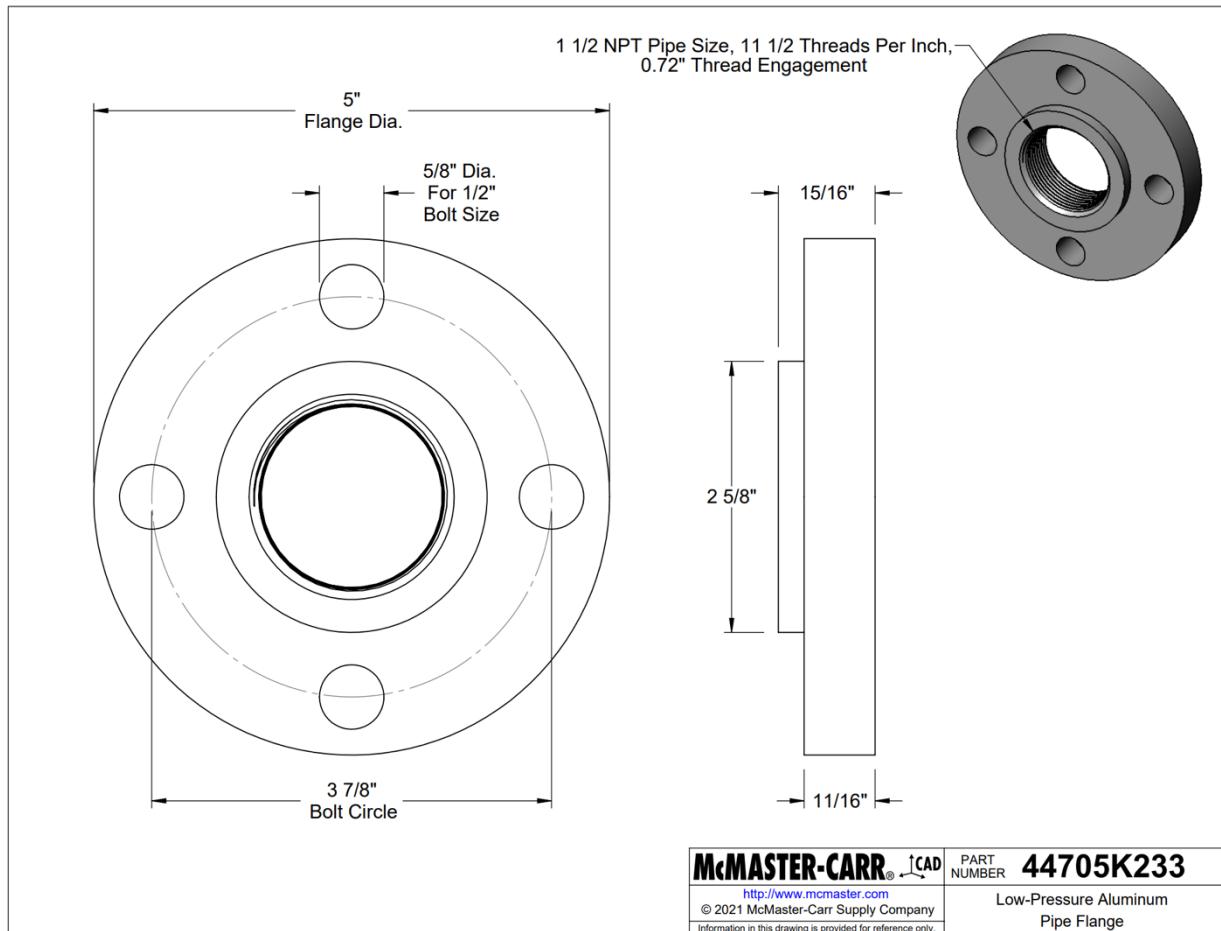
2D CAD drawing of the 44705K233 Flange
